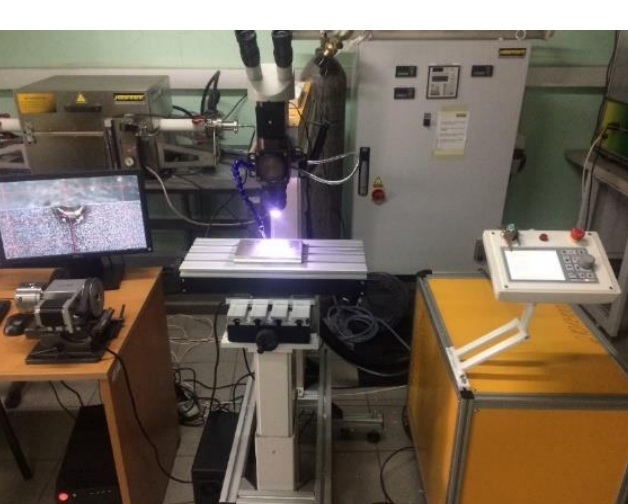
Equipment for laser welding of the LAT-S-300 series
